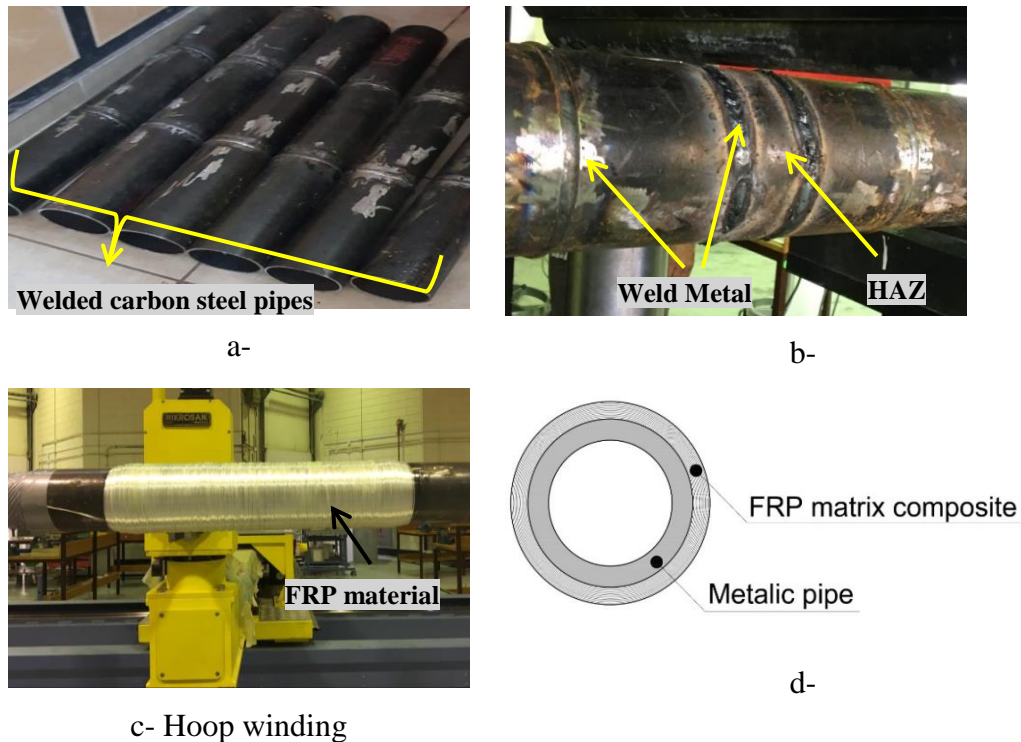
Steel pipe specimen; a- welded steel pipes with two welding lines, b- welded steel pipes with four welding lines, c- welded steel/composite pipe, d- side cross-section of the steel-composite pipe.
